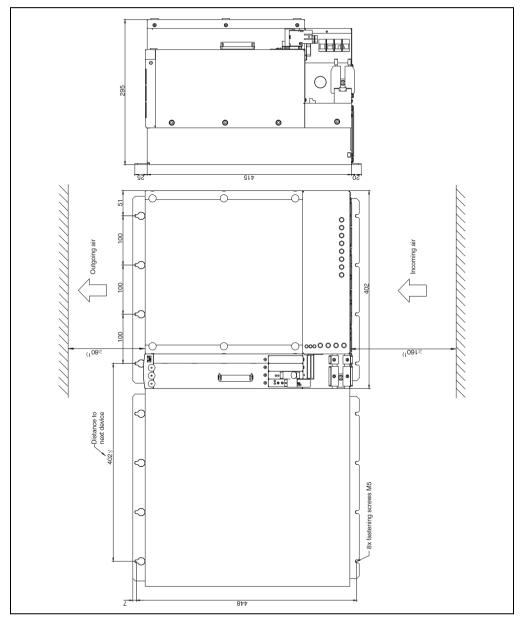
Dimensional diagram and installation dimensions for ACOPOS 128M
